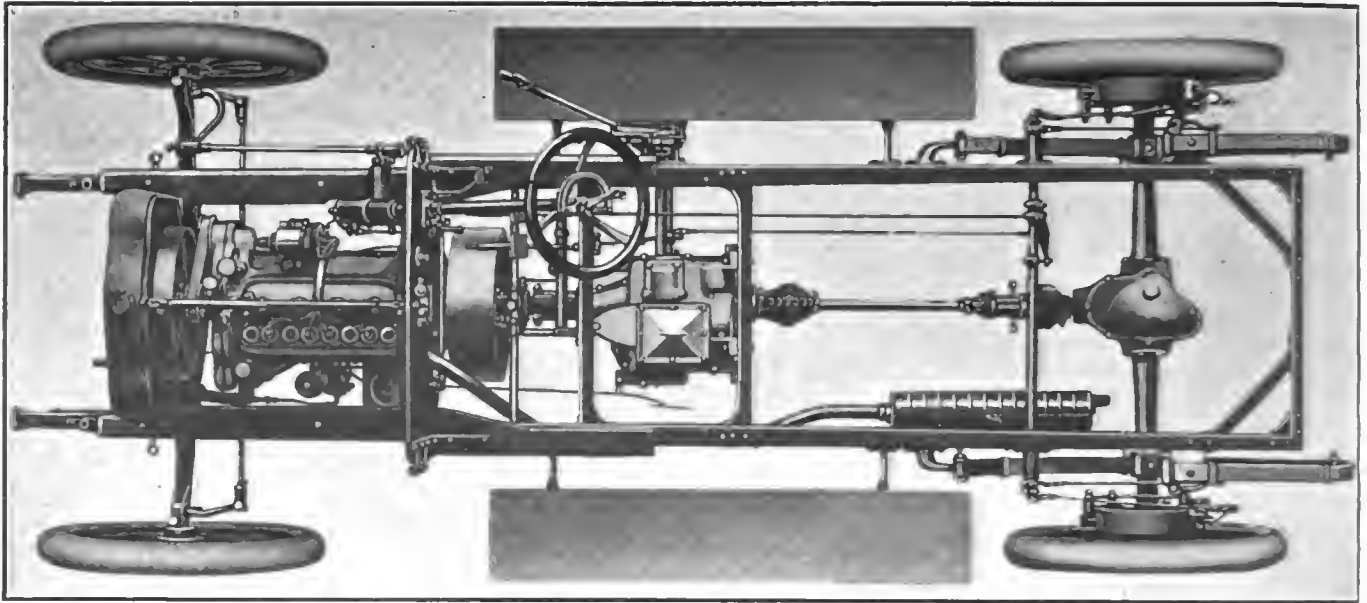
Looking down on the chassis of Model G-A White Gasoline Car showing the arrangement of power plant, transmission and relating parts, together with size, shape, and bracing of the chrome nickel steel frame of large section.
